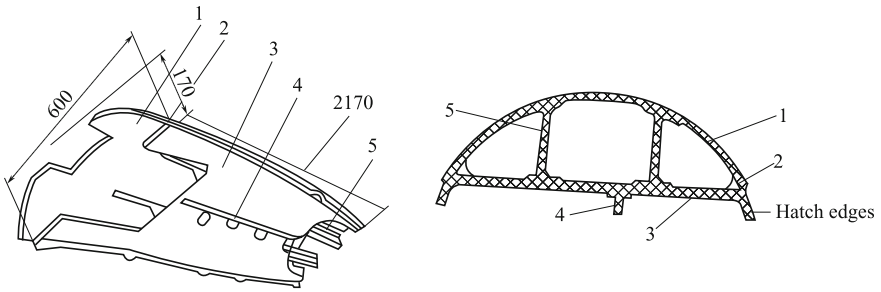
Top cabin box construction. 1 Skin; 2 top beam; 3 top floor; 4 angle shapes; 5 walls
